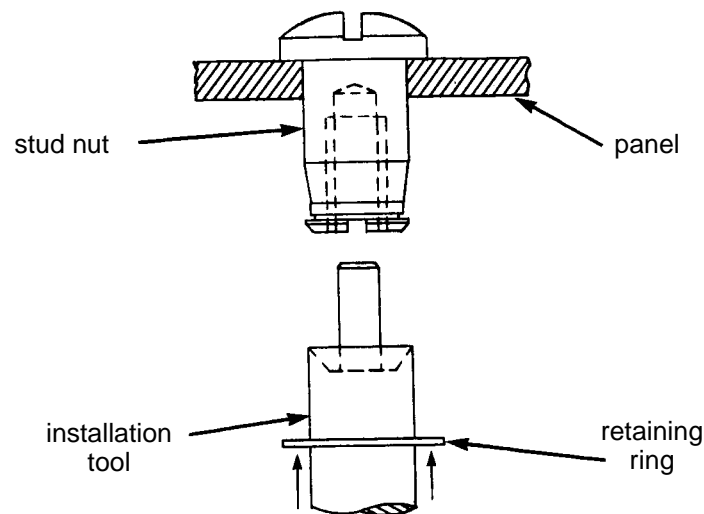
B0209020/CA2035 Wire Form Retaining Ring Installation
